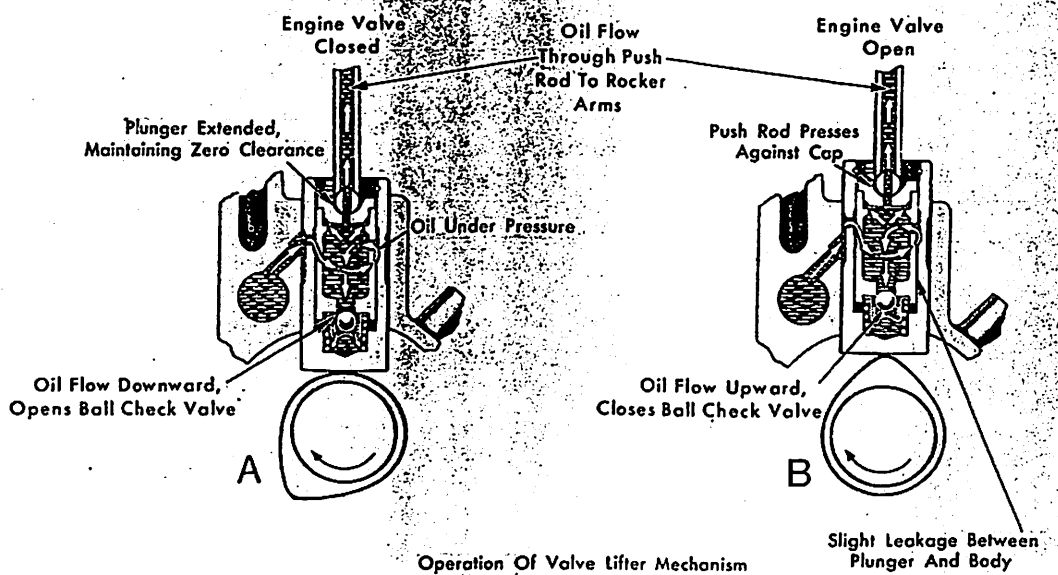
Hydraulic valve lifter operation during two stages. A—Valve closed. B—Valve open. (Cadillac)
